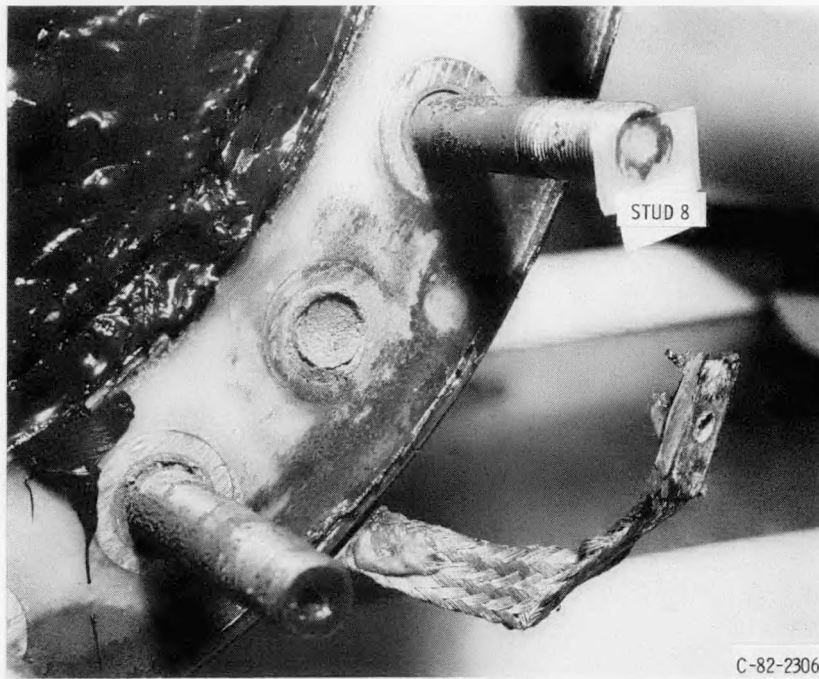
Wood blade root end/stud/spool-piece assembly.
